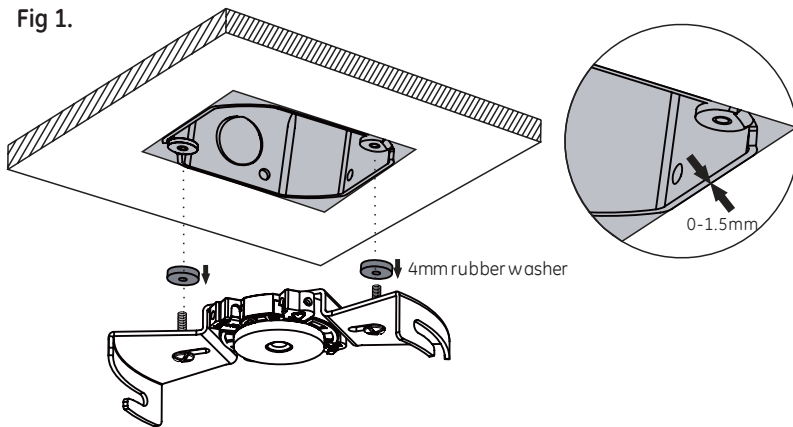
Outlet box is flush with the ceiling or the gap is less than 1.5mm, use 4mm rubber washer provided. Place the washer above the powerplug receptacle as shown.
